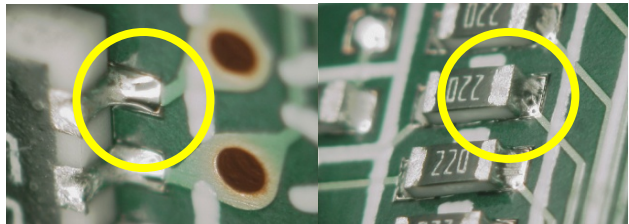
Improved solder joint shine and elimination of side balls due to shorter pre-heating.
